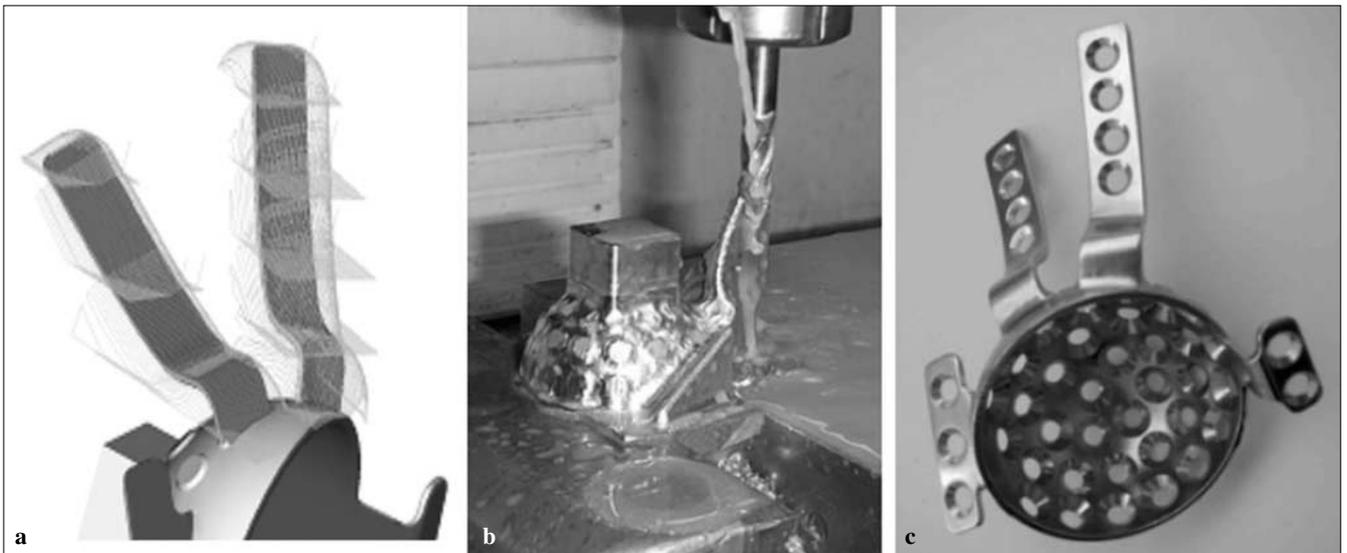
c The stages of cage manufacture in the CAM system. a Generated tool path. b Milling on CNC machine. c The manufactured cage
